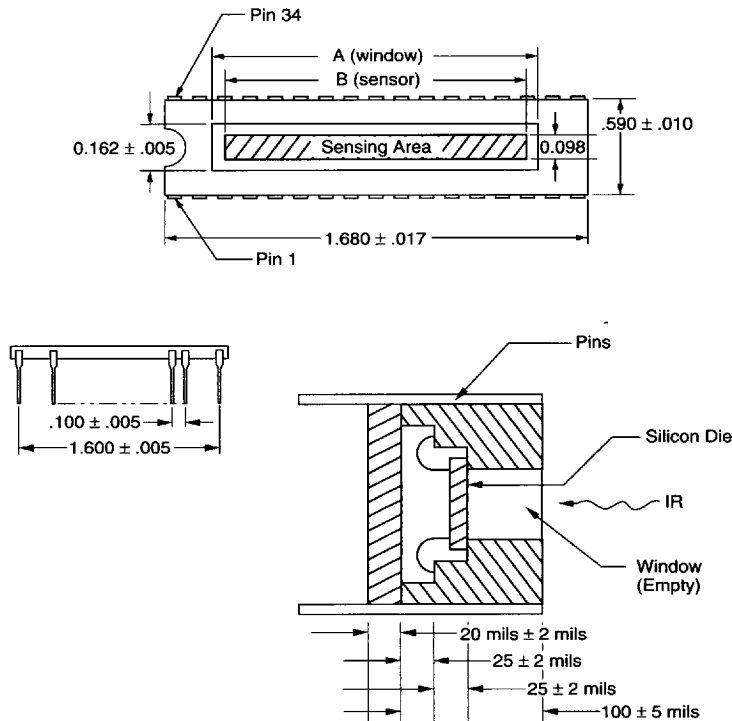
Package Dimensions (all dimensions are typical and in inches unless otherwise specified)
